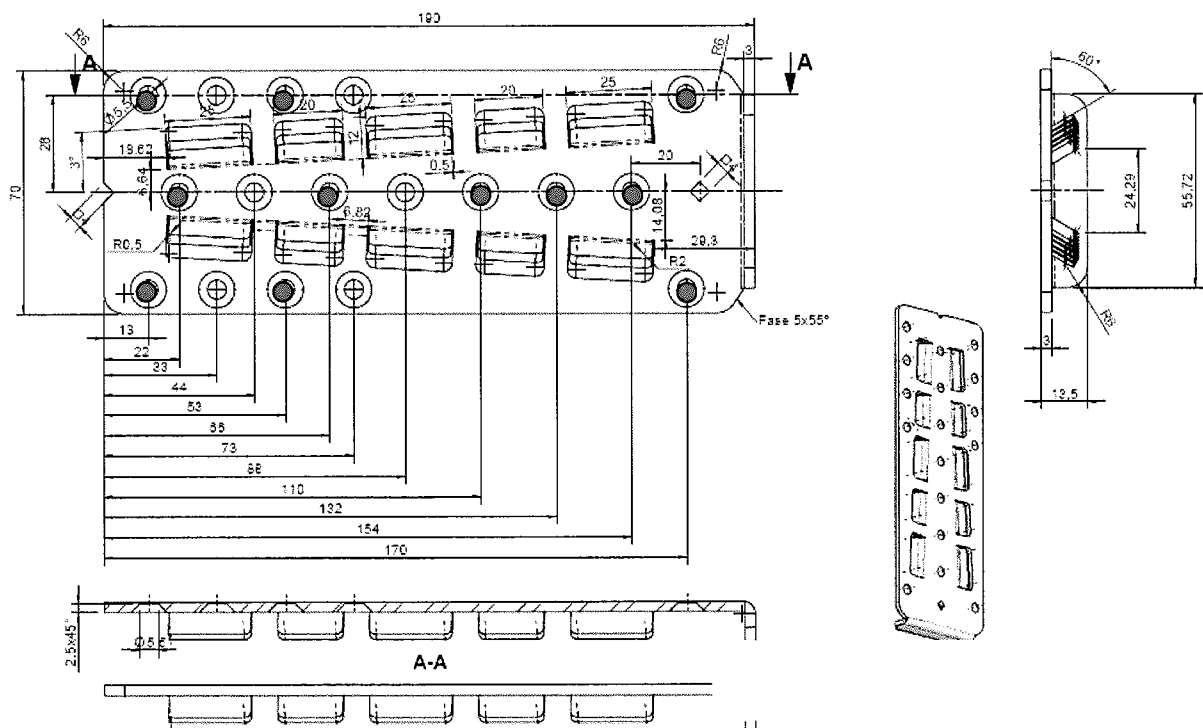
Header plate of the beam connector 190 x 70 (●screws for column connection)
